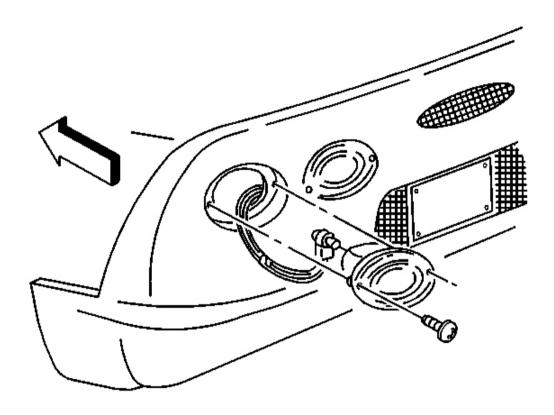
Tail Lamp At Fascia To Tail Lamp Socket Courtesy of GENERAL MOTORS CORP.
